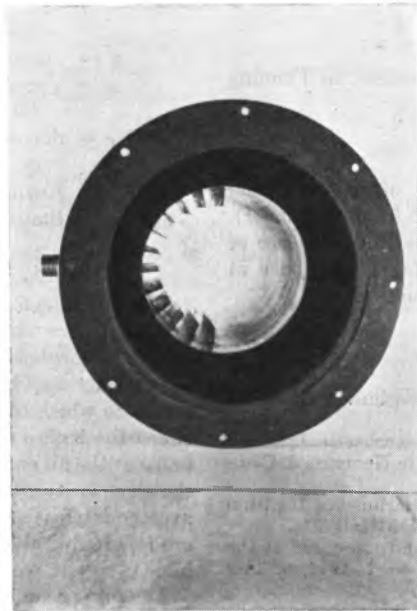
STEEL BARREL AND DIVISION STRIPS
